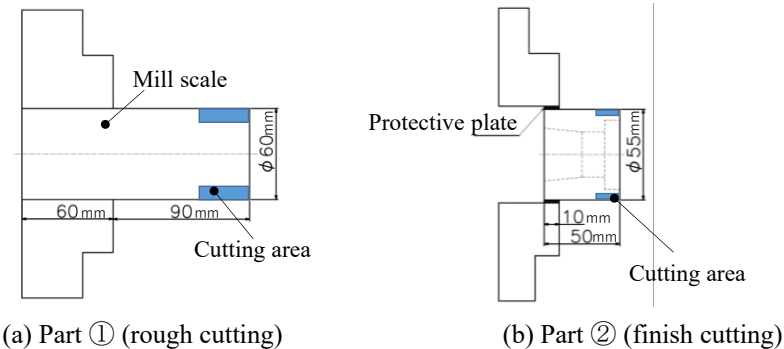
Workpiece shape for selected grade 2 machining (lathe) skills test.
